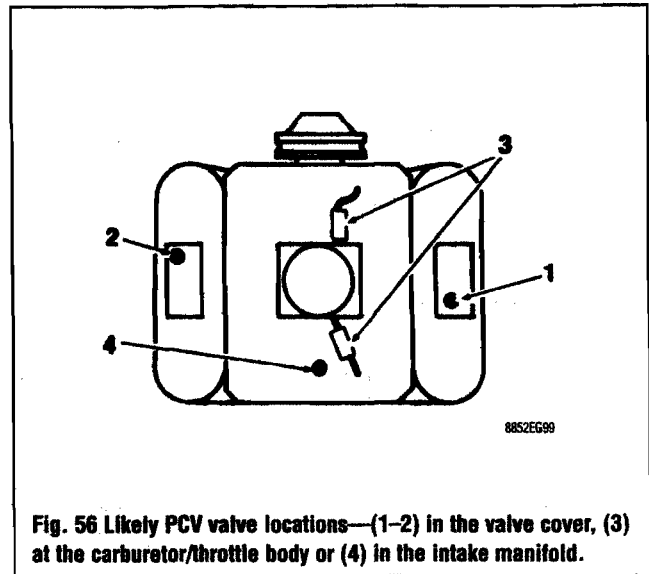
Likely PCV valve locations—(1-2) in the valve cover, (3) at the carburetor/throttle body or (4) in the intake manifold.
